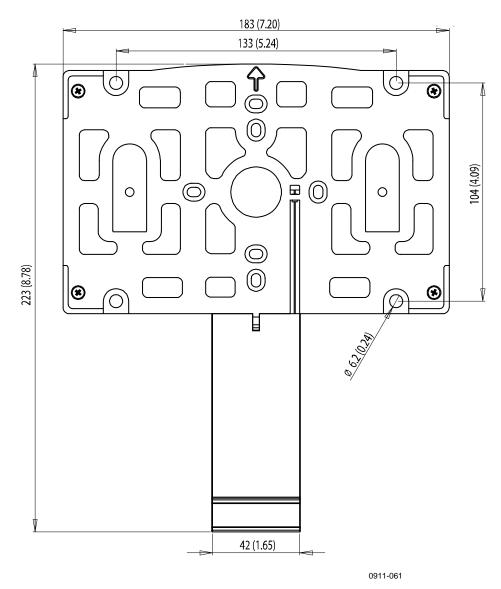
Dimensions of the Probe Holder Plate (mm/inch)
